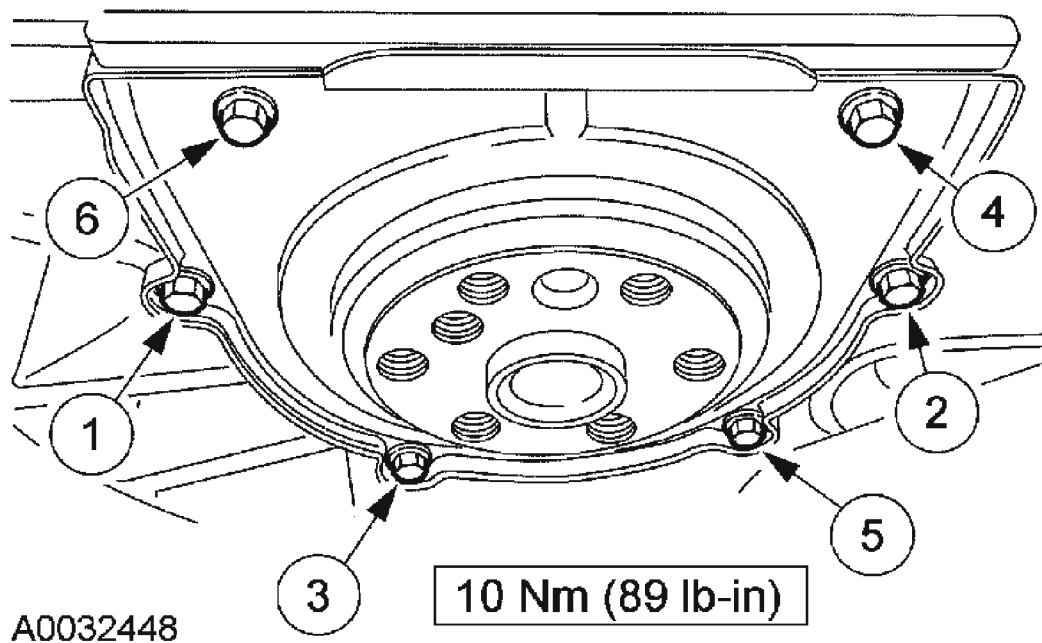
Identifying Tightening Sequence Of Crankshaft Rear Main Oil Seal Bolts
